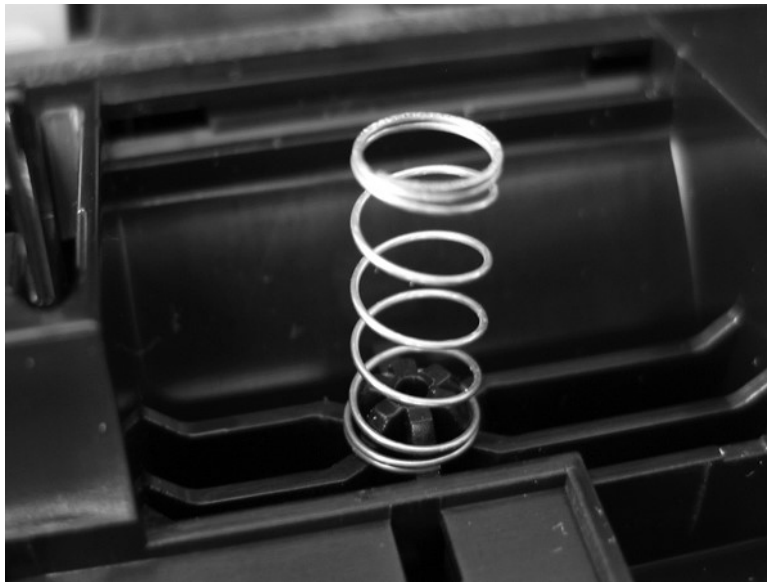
Remove the document feeder separation pad and separation pad spring (5 of 5)
